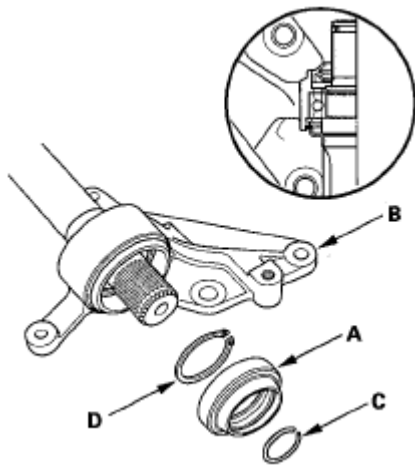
Identifying Intermediate Shaft Outer Seal And Bearing Support
